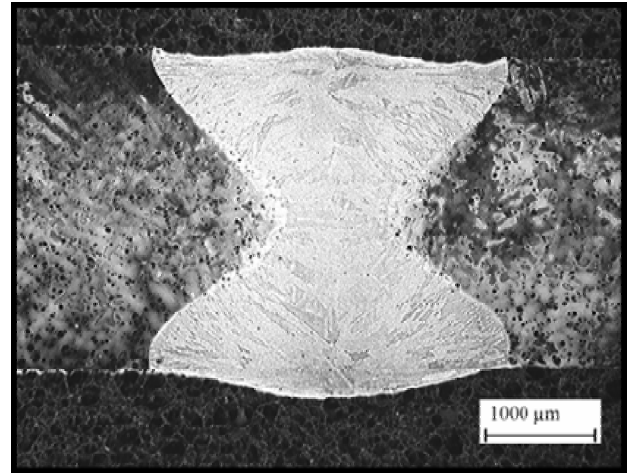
Cross-section of the optimized laser weld without filler material in CC-material. Before PWHT, Kallings etch.
